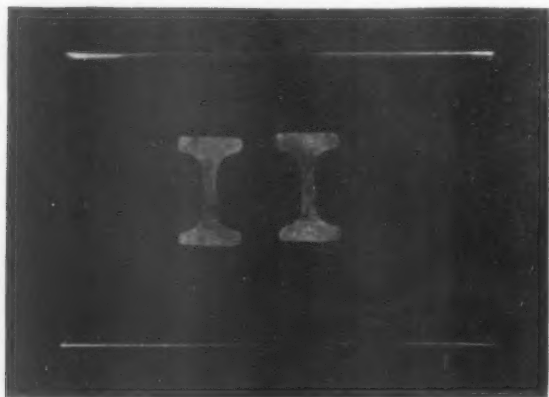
FILM HOLDER WITH TWO SLICES OF METAL MOUNTED OUTSIDE OF THE BLACK PAPER.
